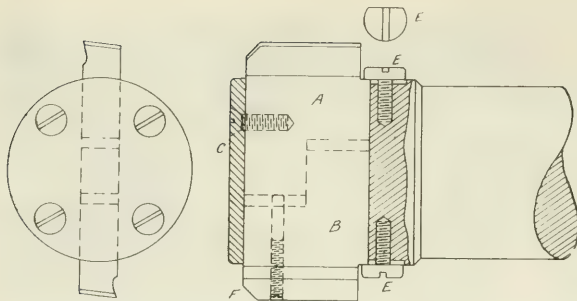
DETAIL OF FLOATING CUTTER BAR.
